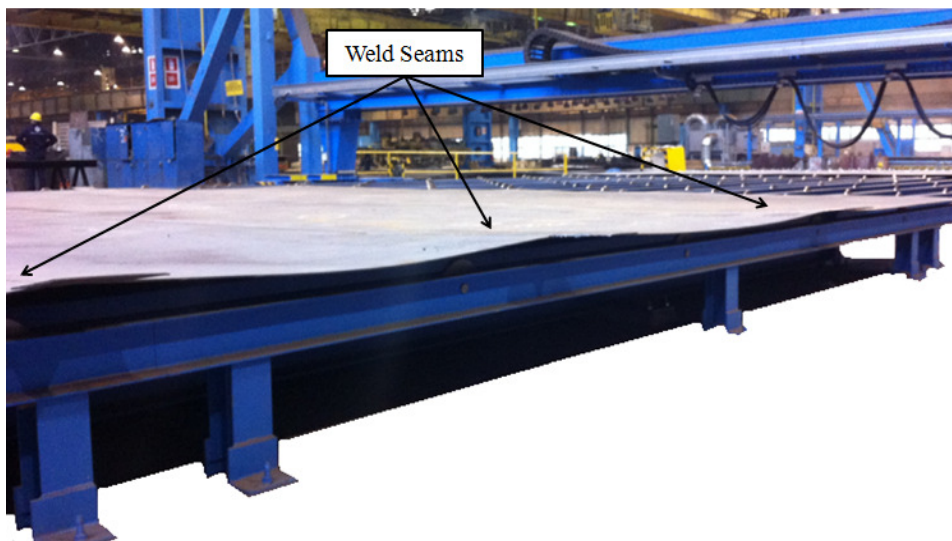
Problem: deformation nearby the weld seam.
